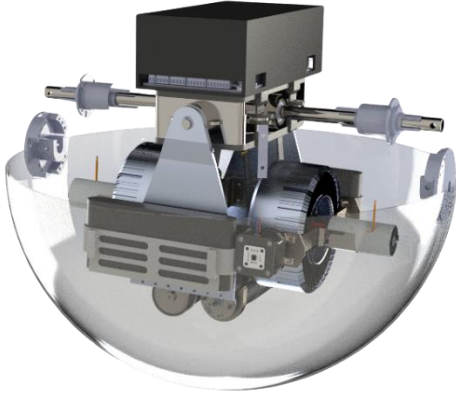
Mounting the pendulum assembly on the lower half of the shell.
